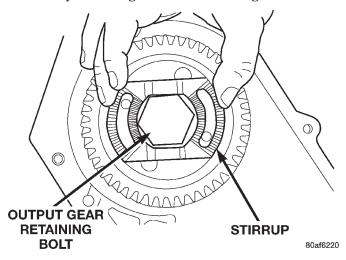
Output Gear Retaining Bolt Stirrup (Serration Side Out)
